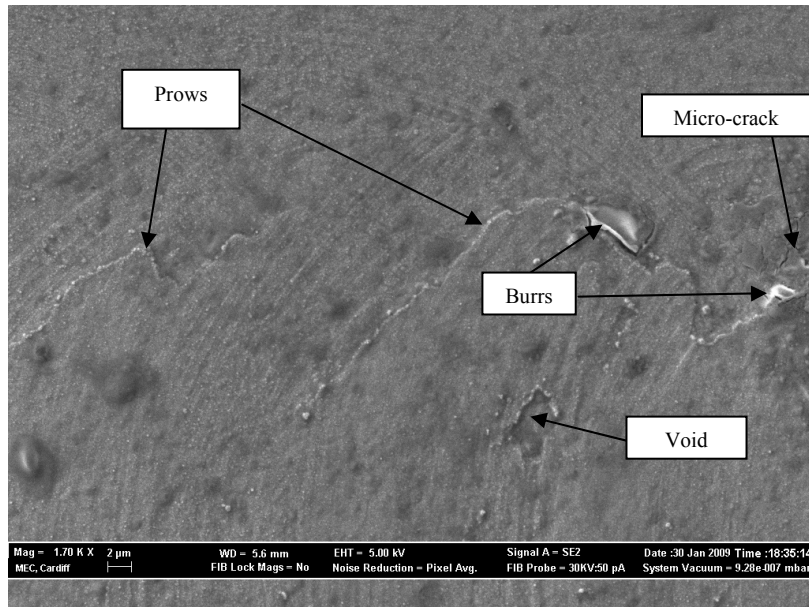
Machined floor surfaces for CG Cu99.9E at a feed rate of 0.75 μ m/tooth and cutting speed of 5 m/min.
